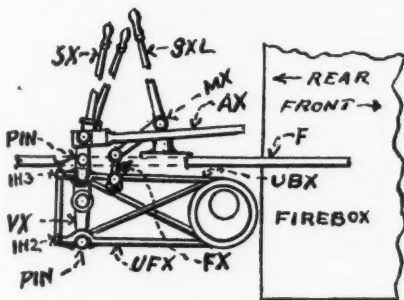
M. W. Baldwin's Full Stroke Valve Gear with Single Eccentric; 1835.
